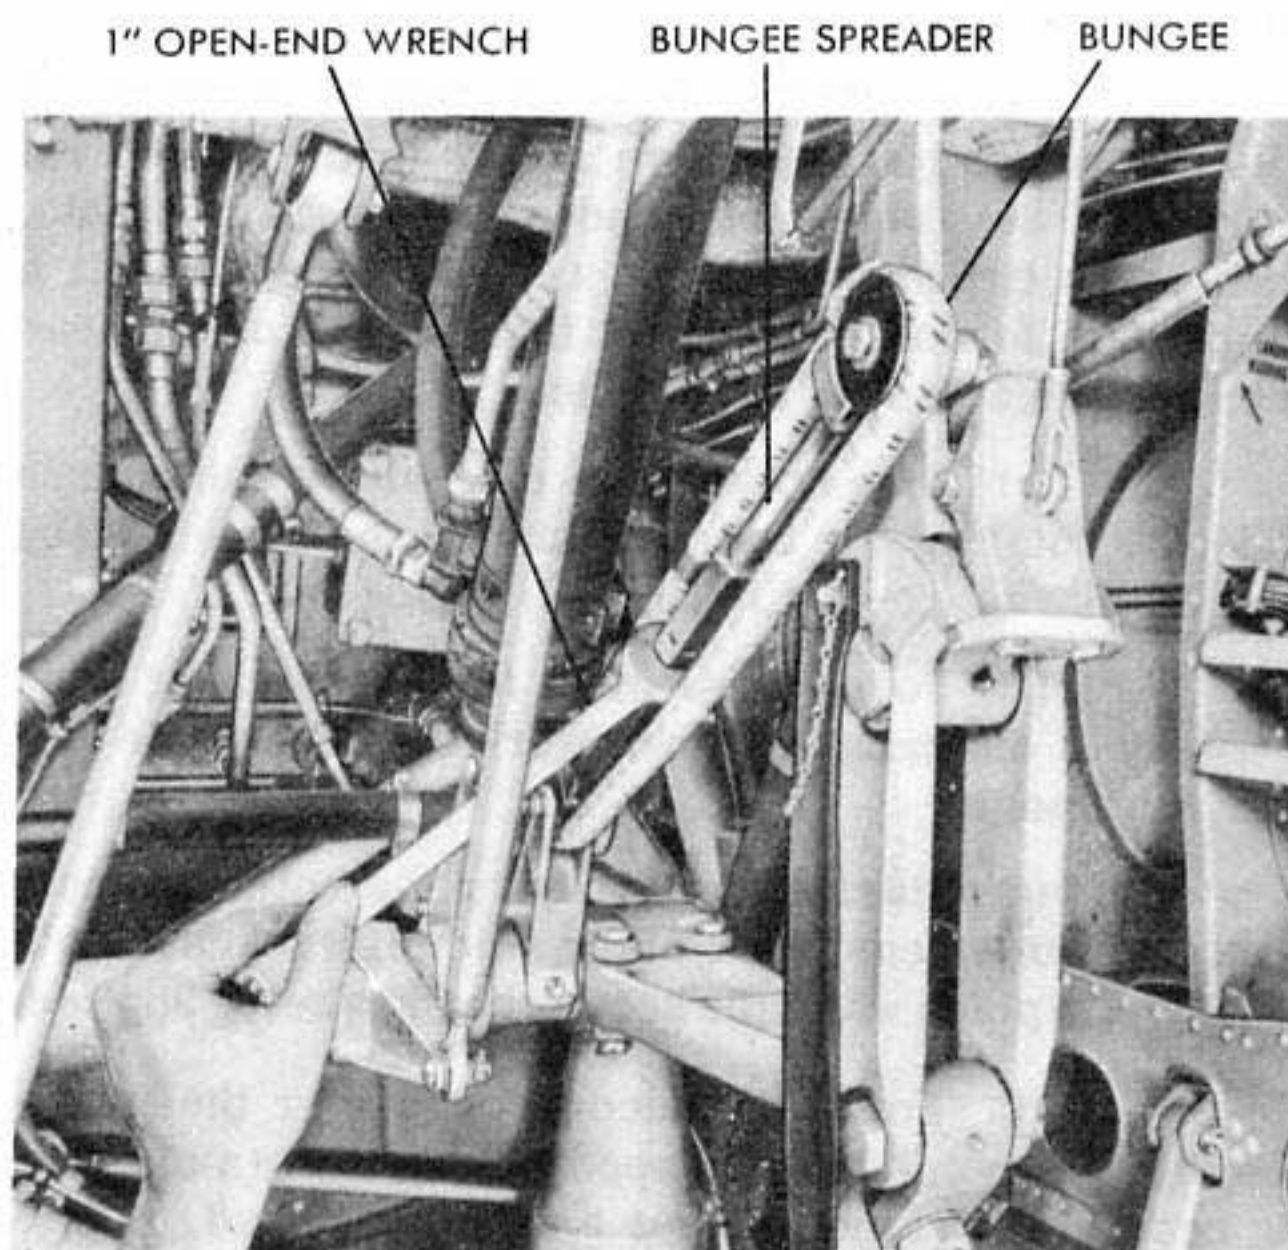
INSTALLING MAIN ALIGHTING GEAR BUNGEE
